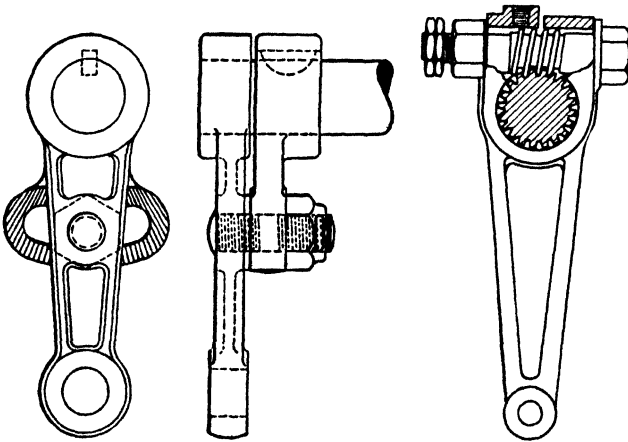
(left).—TWO-PART LEVER FOR BRAKE ADJUSTMENT.
